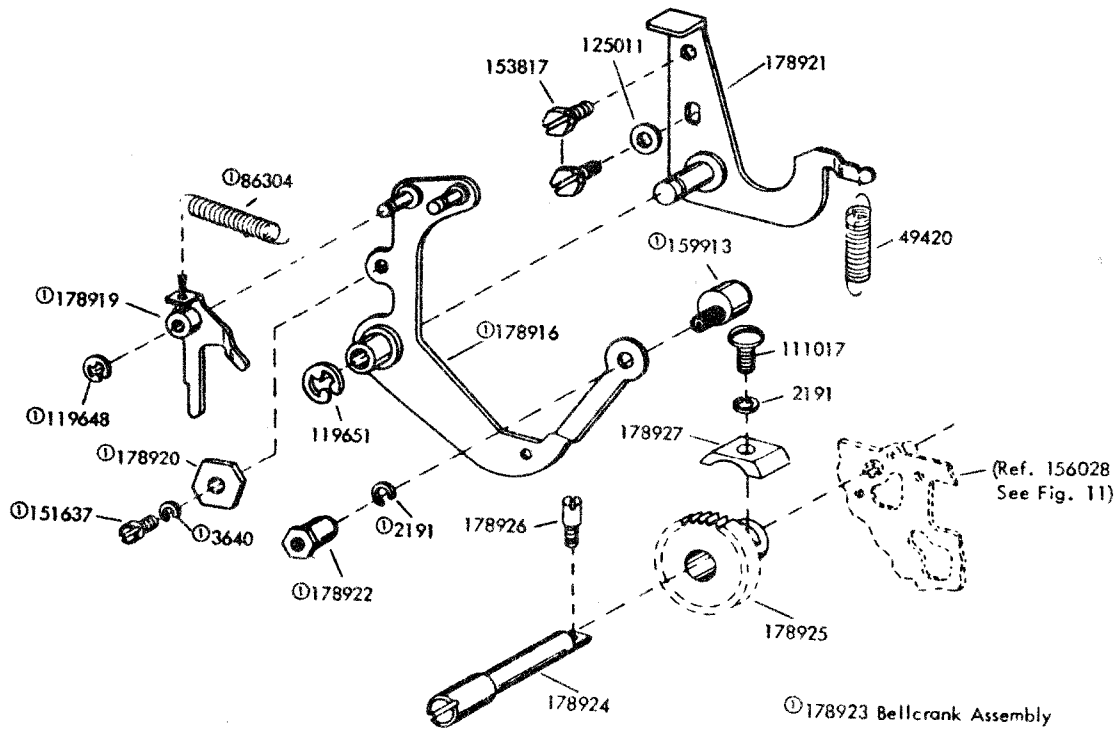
178917 MODIFICATION KIT TO PROVIDE BACKSPACE MECHANISM FOR FULLY PERFORATED TAPE AND PRINTING BETWEEN FEED HOLES
